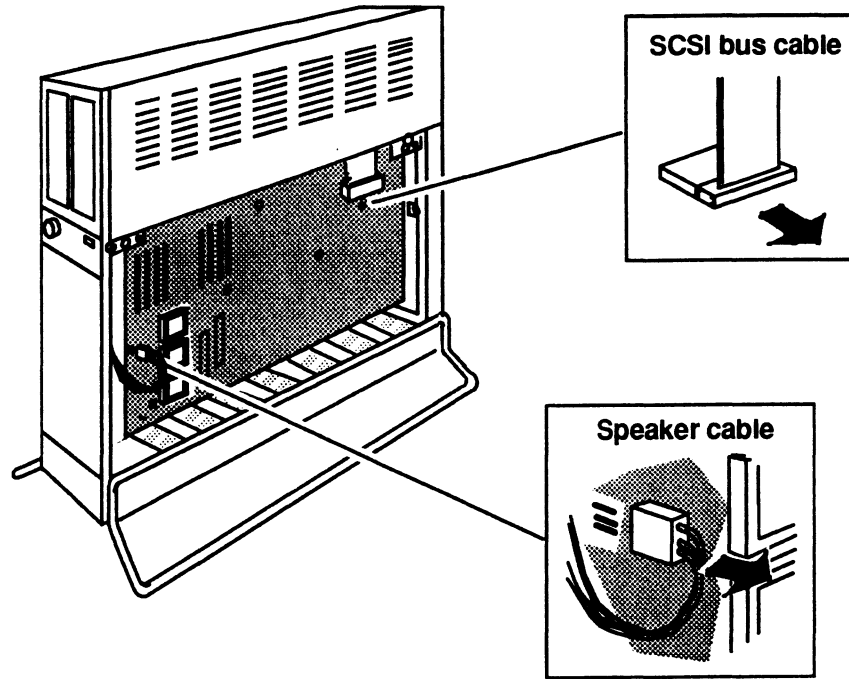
Unplugging the Speaker and the SCSI Bus Cables from the System Board
